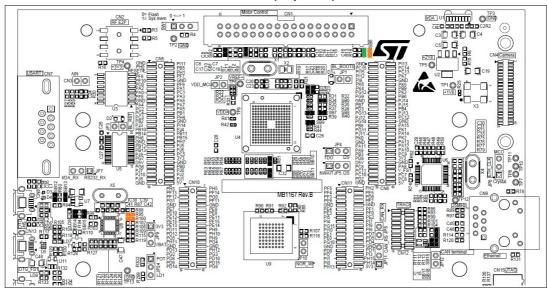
STM32756G-EVAL evaluation board motor control PCB reworks (Top side)
